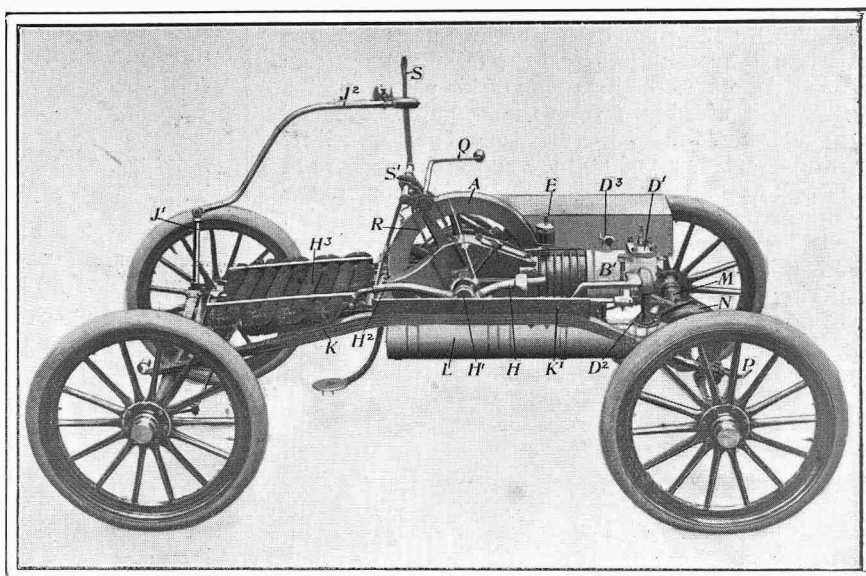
Elevation of the 1904 Oldsmobile with body removed.
